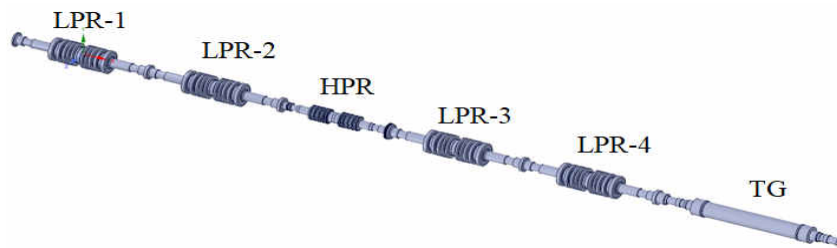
Geometric model of the shaft line of the K-1000-60/3000 LMZ turbine unit.
